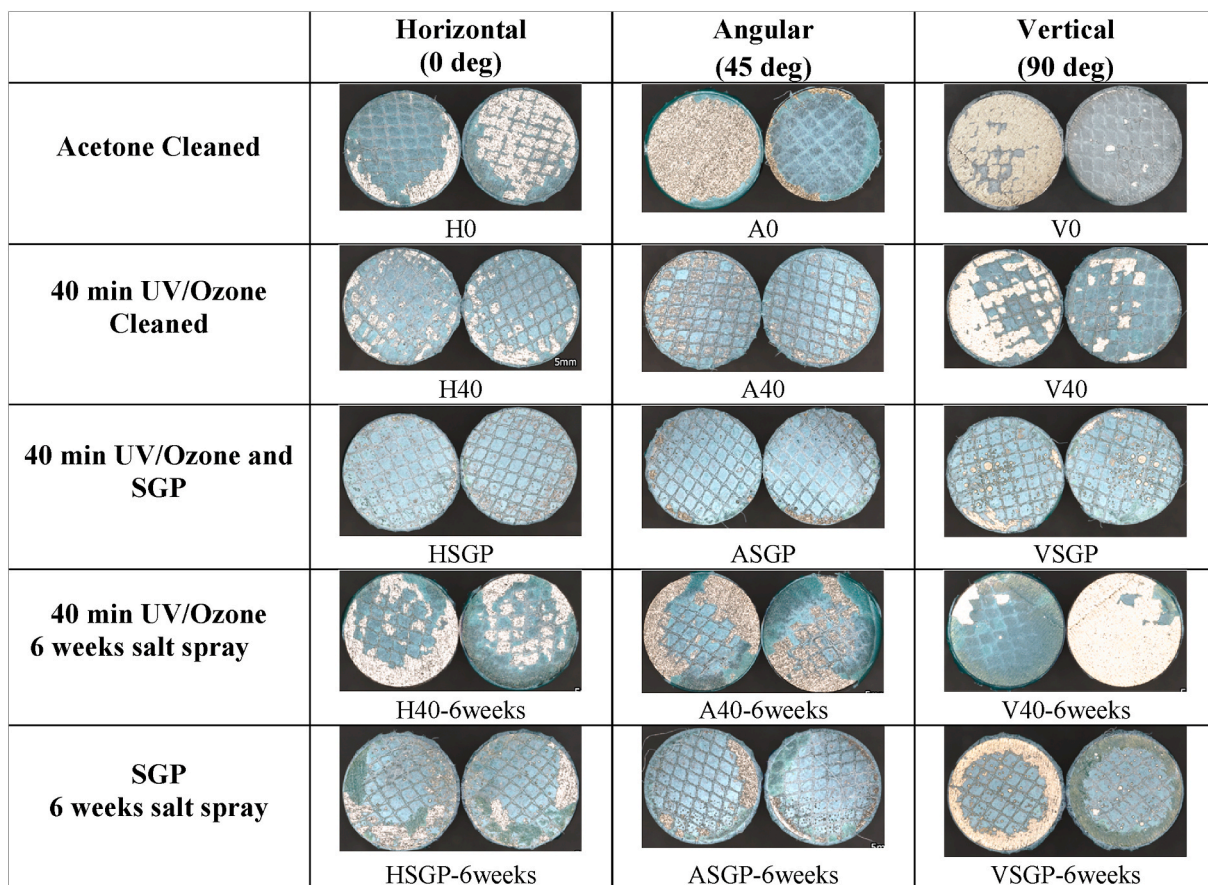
Fractured surfaces after 0 and 6 weeks of salt spray exposure.
